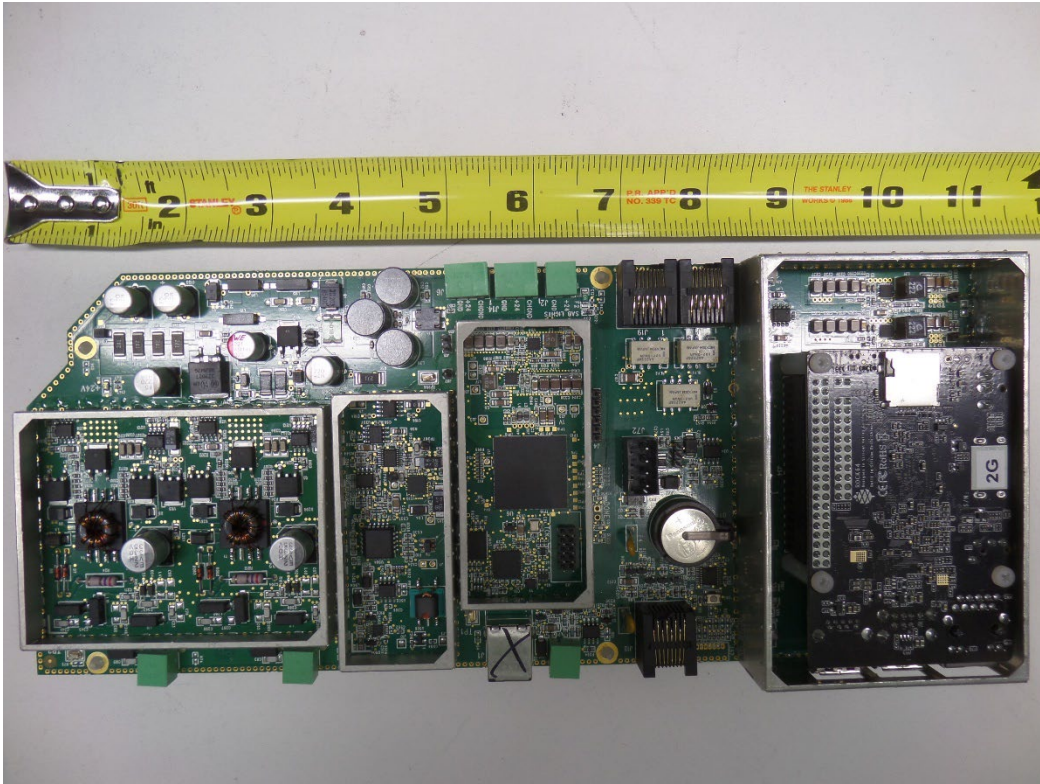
NG12 PRI/PAB RF PED EAS RF BOARD TOP SIDE WITHOUT SHIELDS
